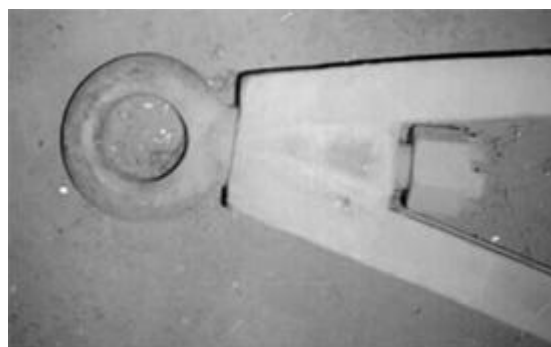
Buttonhole and bolt assembled to the trailer lance. The buttonhole is connected to the tractor mooring hoop.
